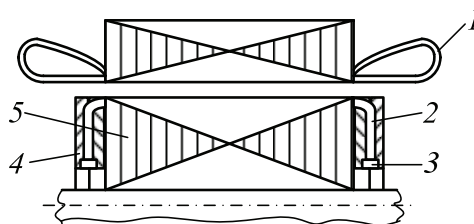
Sketch design of induction motor with two-end ferromagnetic screens parts of the rotor windings
